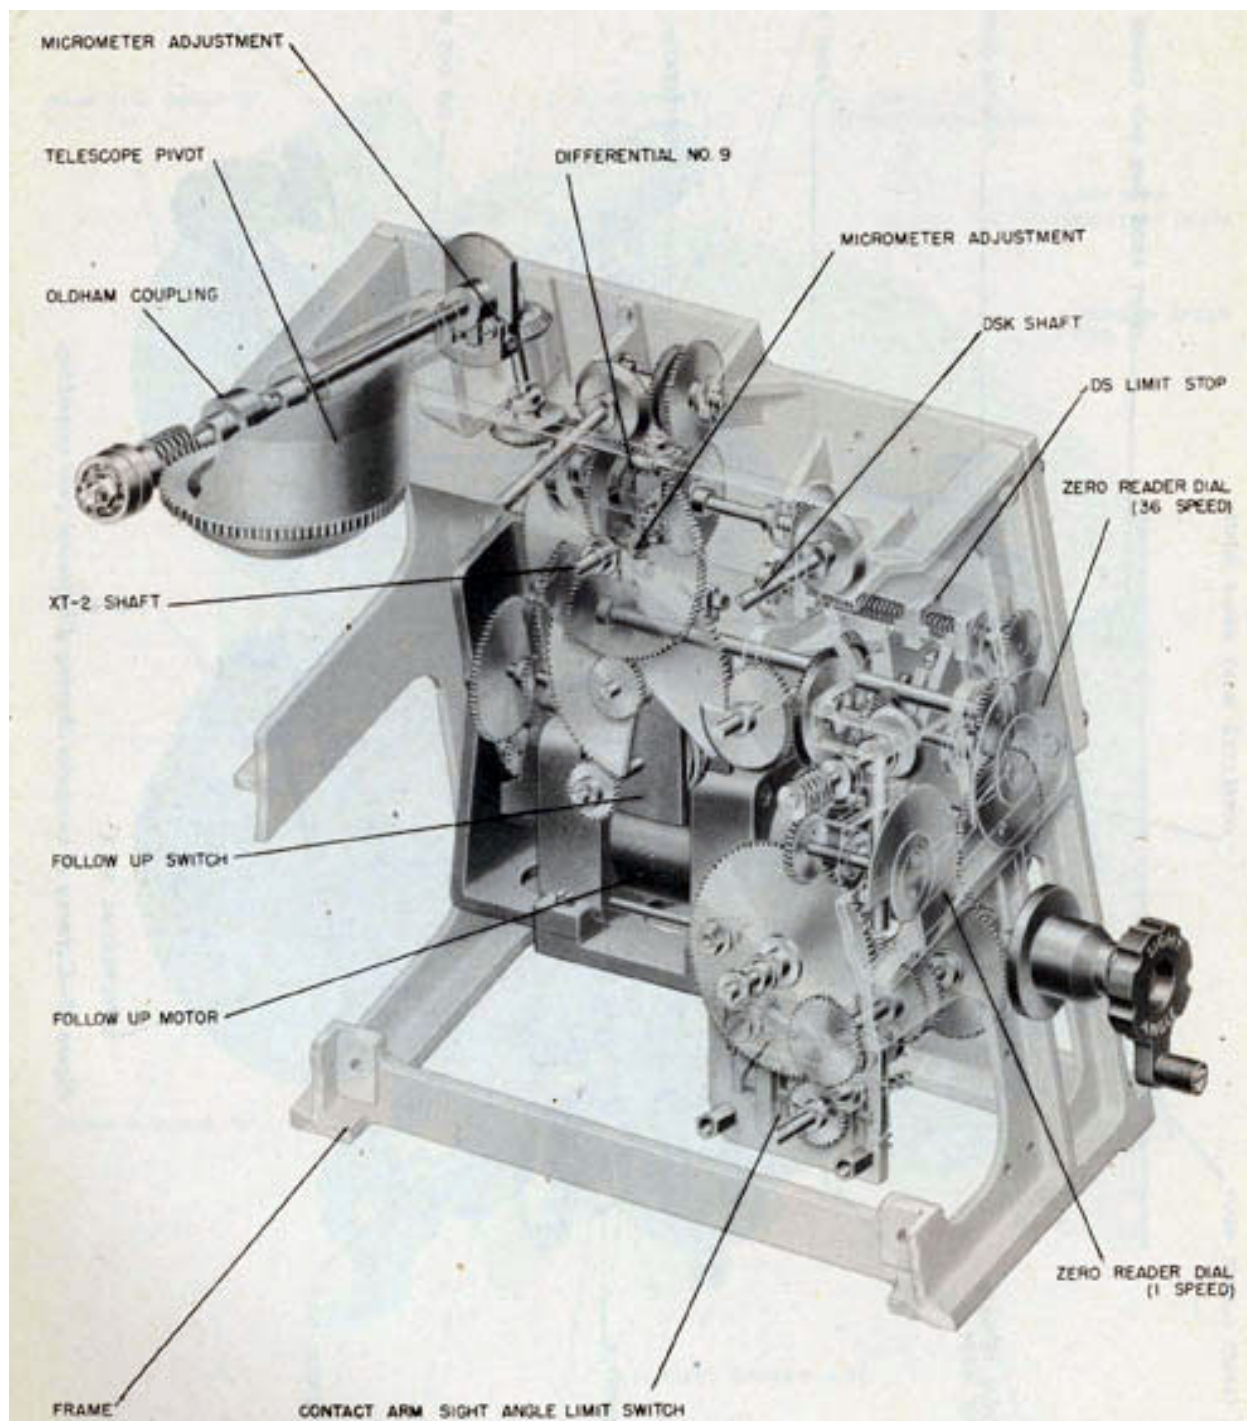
Cutaway of computer shafting and gearing showing shafting connection to telescope pivot and sight angle limit switch.
